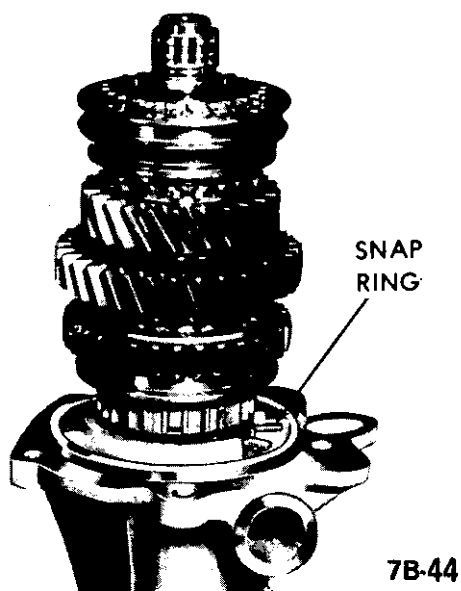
B-44 Mainshaft Assembly Secured Into Rear Bearing Retainer by Snap Ring
